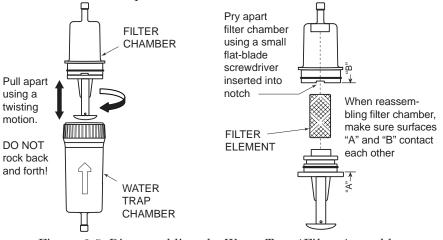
Disassembling the Water Trap/Filter Assembly
